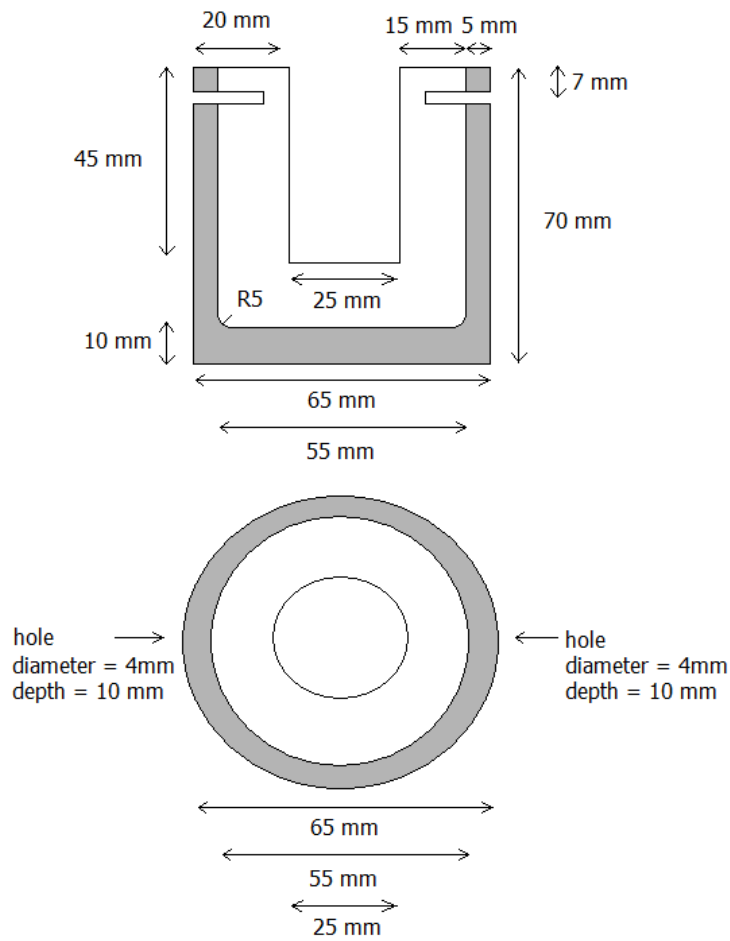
Work drawing tap hole clay/ramming paste crucible inside graphite shell
